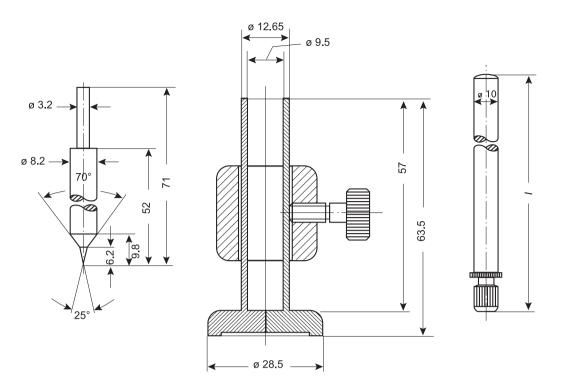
3 – Micro-cone (m = 7.0 g), suitable container and shaft (l = 116 mm; m = 16.8 g) Dimensions in millimetres
